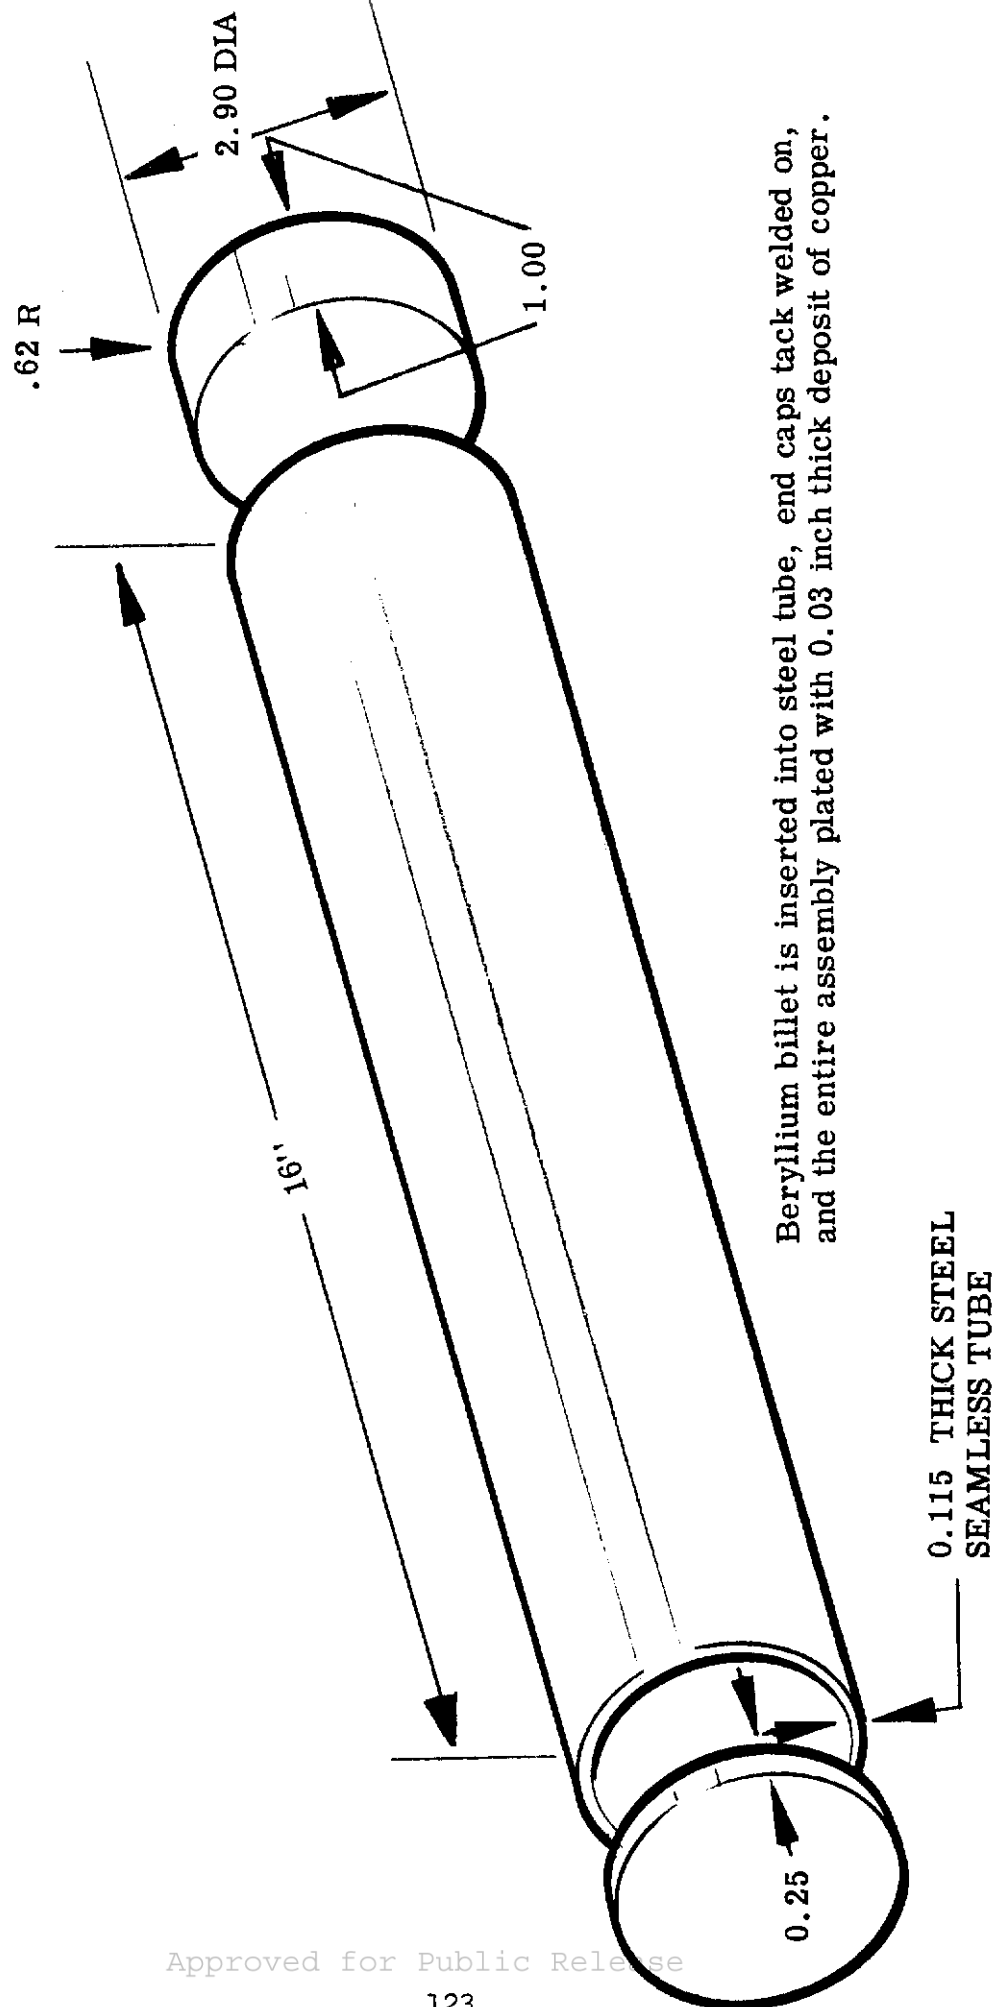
DETAILS OF COMPOSITE BILLET COATINGS.
